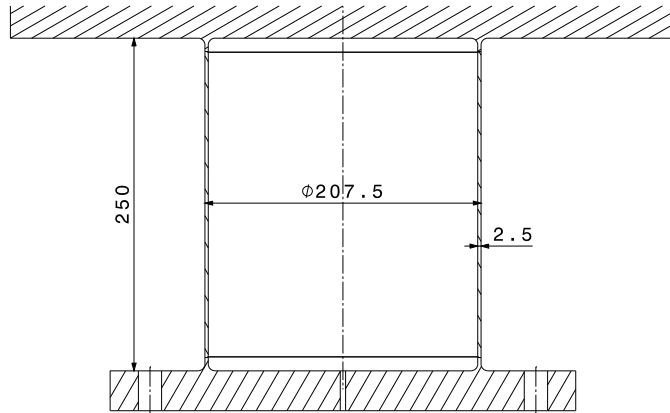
Reduced-sized mock-up: Dimensions of cylinder in mm.
